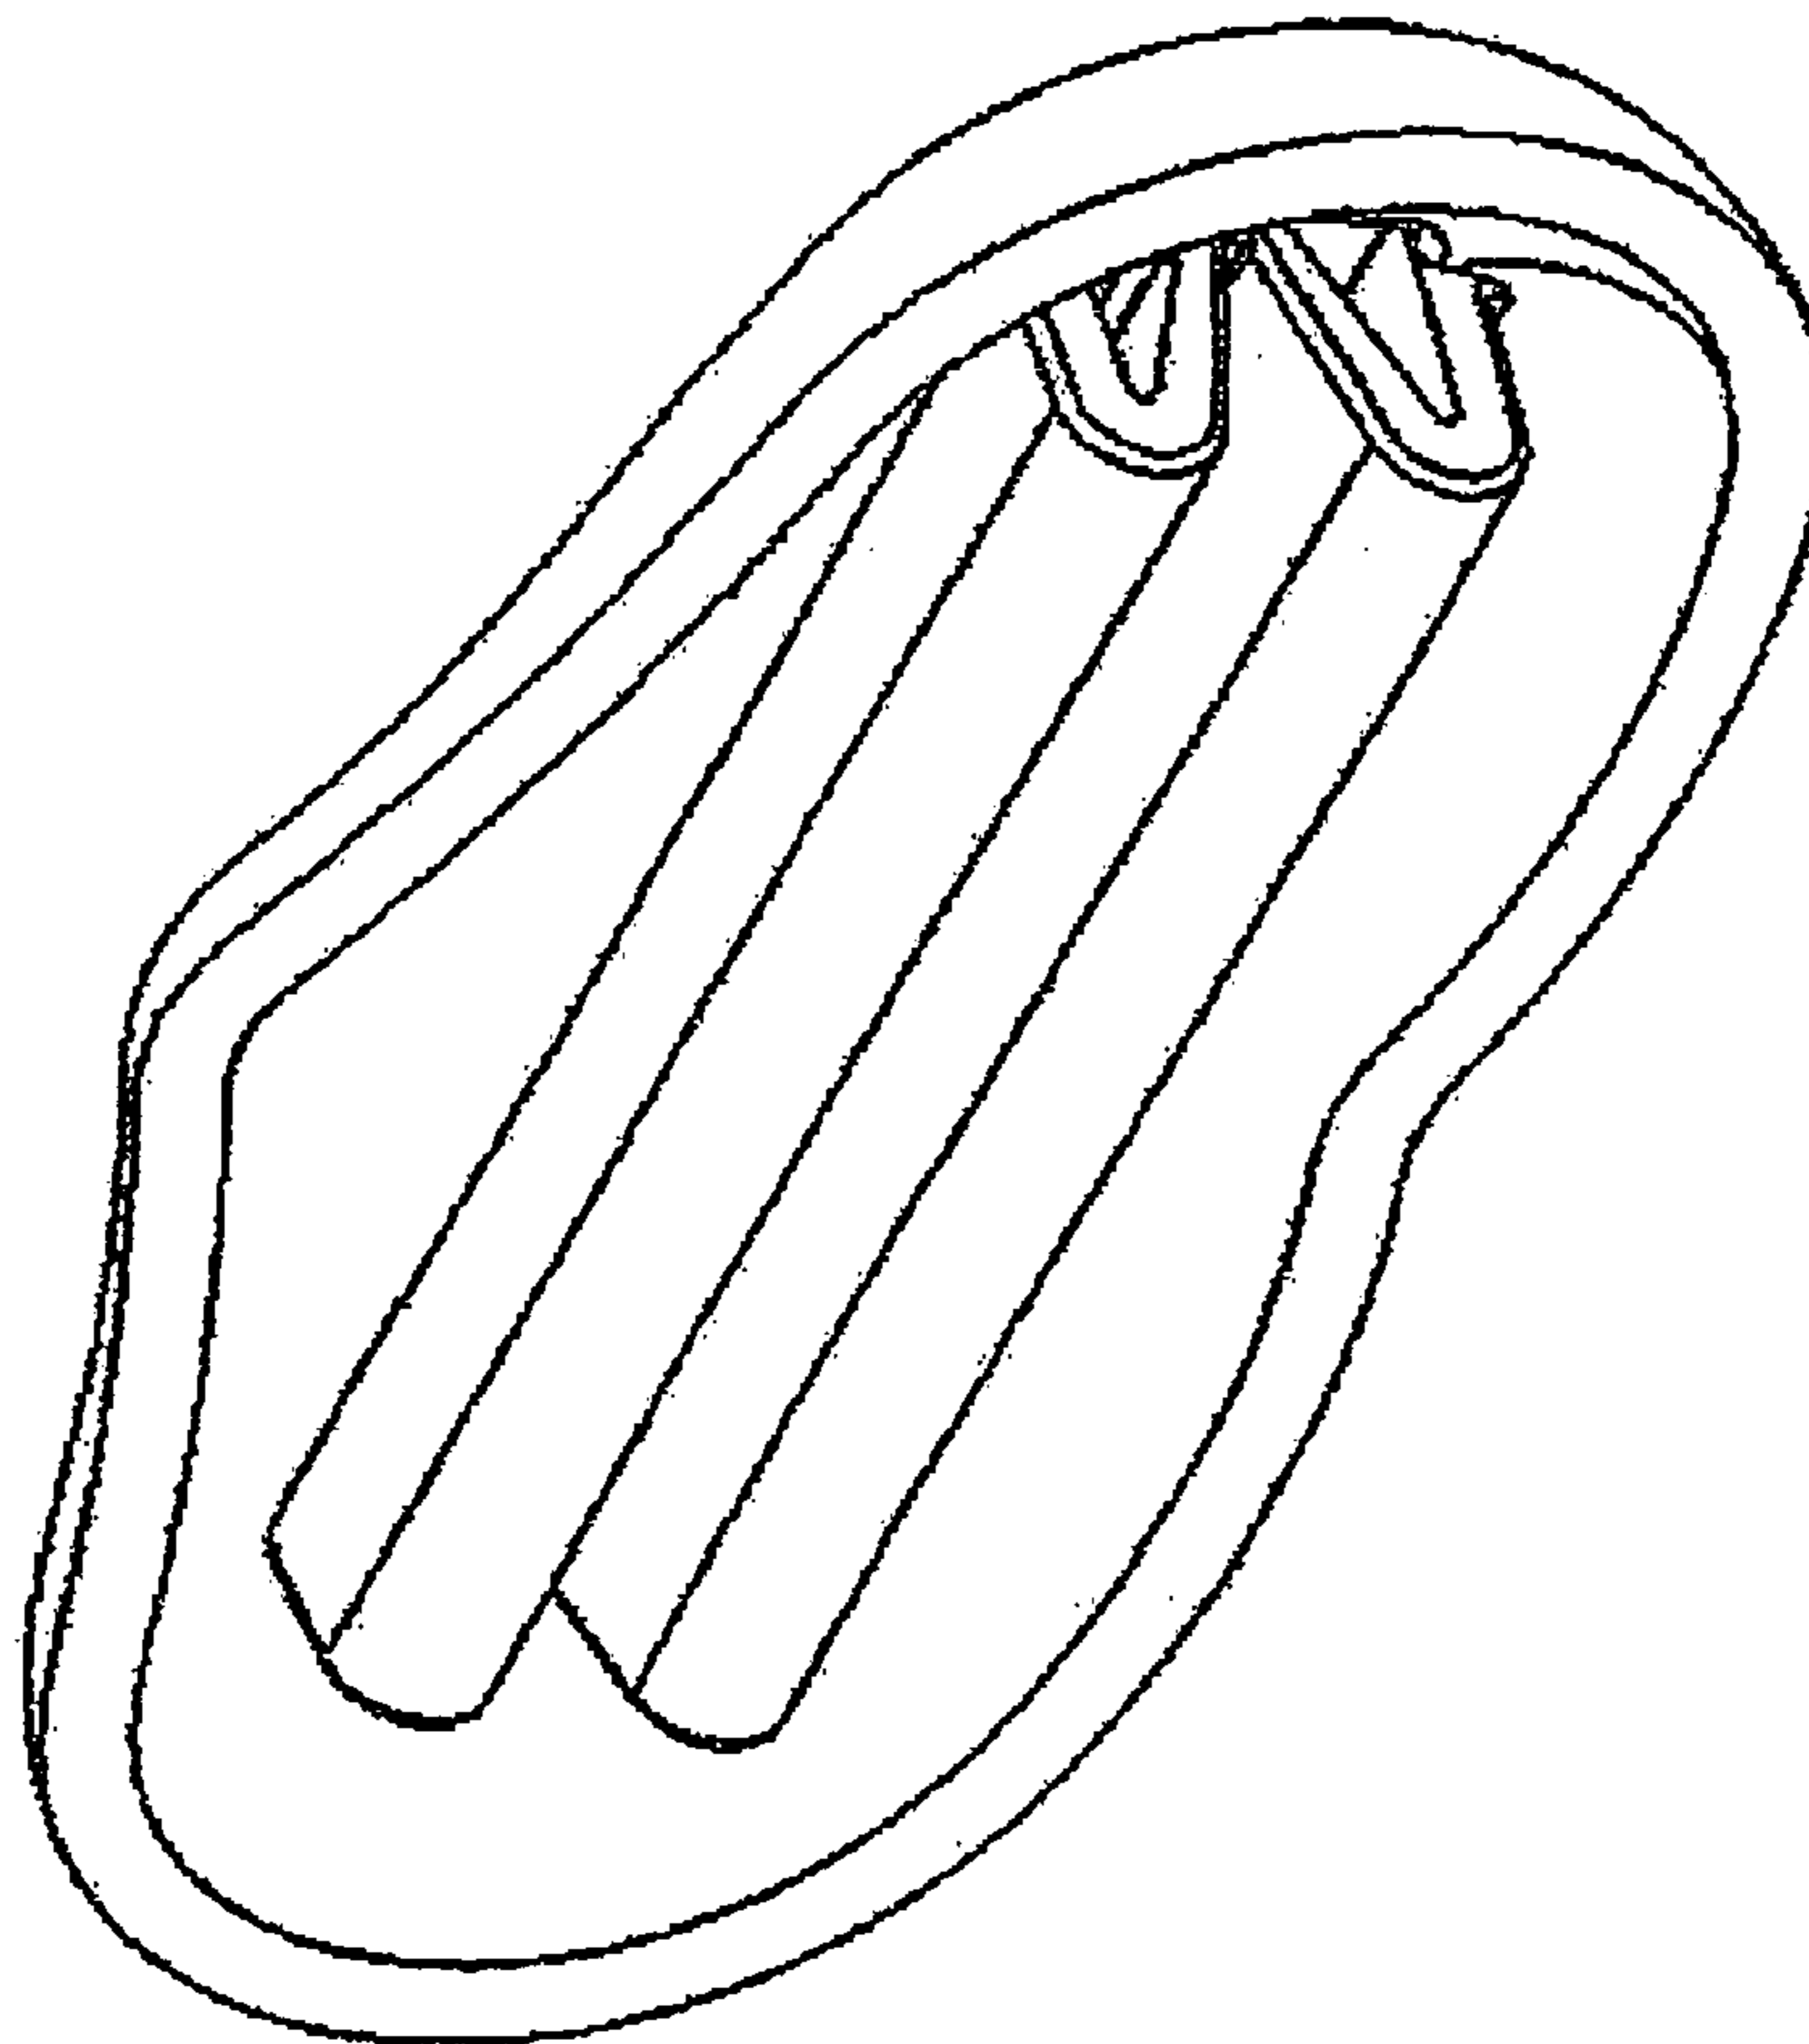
is a bottom view of the tool for squeezing contents from flexible tubes;
